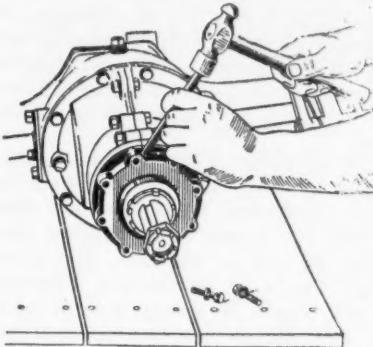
Adjusting large bevel gear by removing side plate and gently driving adjusting ring around with a hammer and a piece of brass
